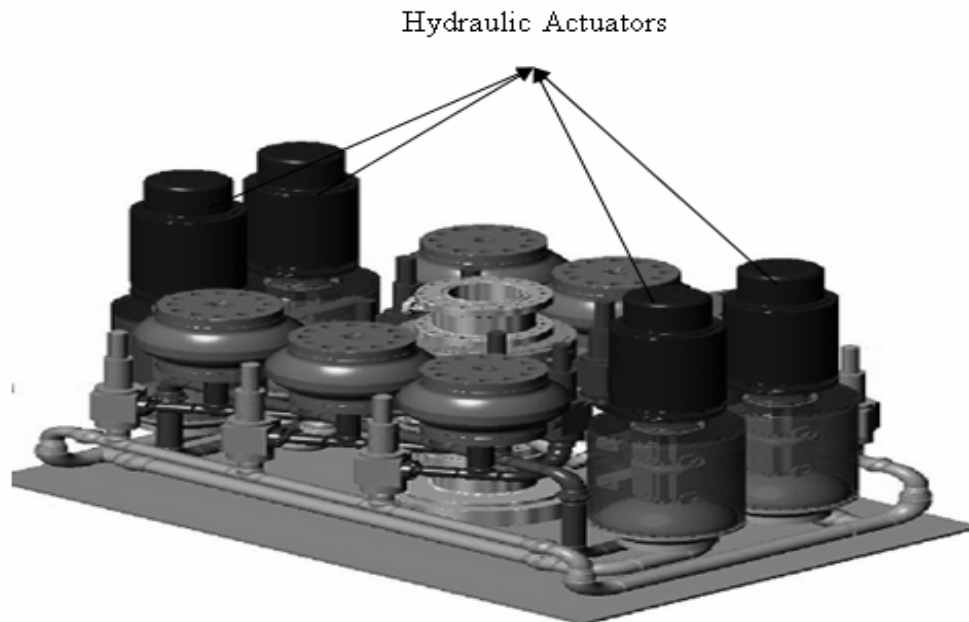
Hydraulic Actuators for a Seawater Driven Diaphragm Pump.²
